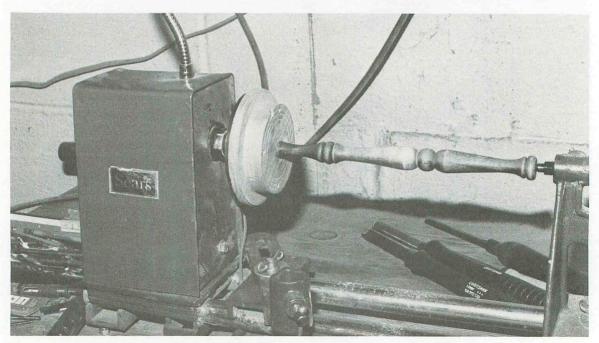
Letter opener handles being cut and shaped from an old spindle.
